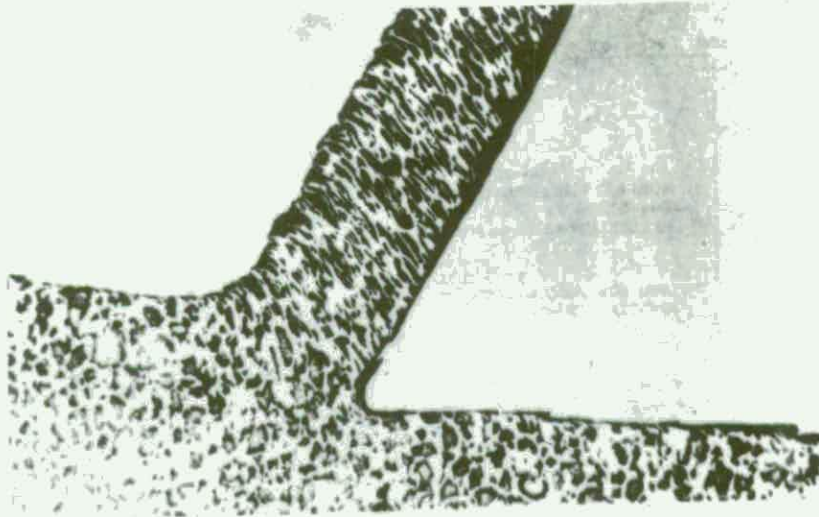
Photomicrograph of a drilling chip at a 0.335 in. radius on a 3/4 in. diam. drill
